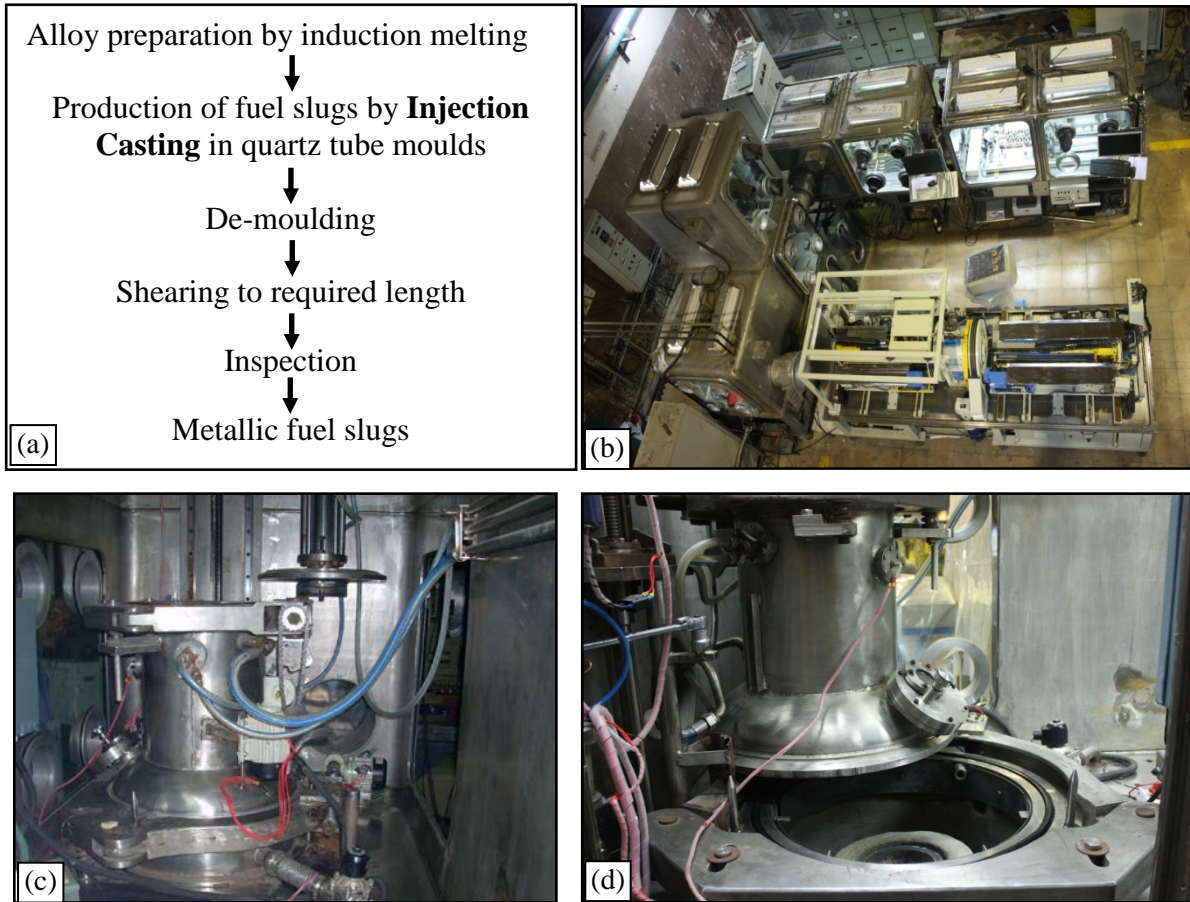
Metallic Fuel Fabrication; (a) Flow-sheet, (b) Fuel fabrication and inspection facility at BARC, (c) & (d) Inside view of Injection casting glove box
